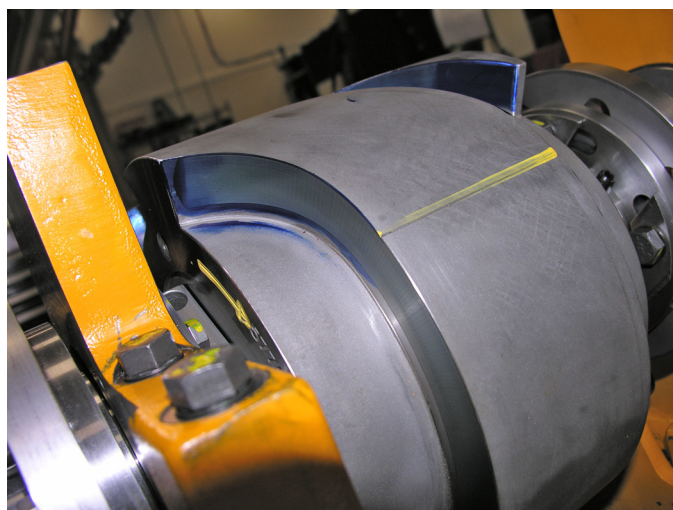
GOOD PATTERN SHOWING FOLLOWER TRACKING FLAT AGAINST THE CAM
